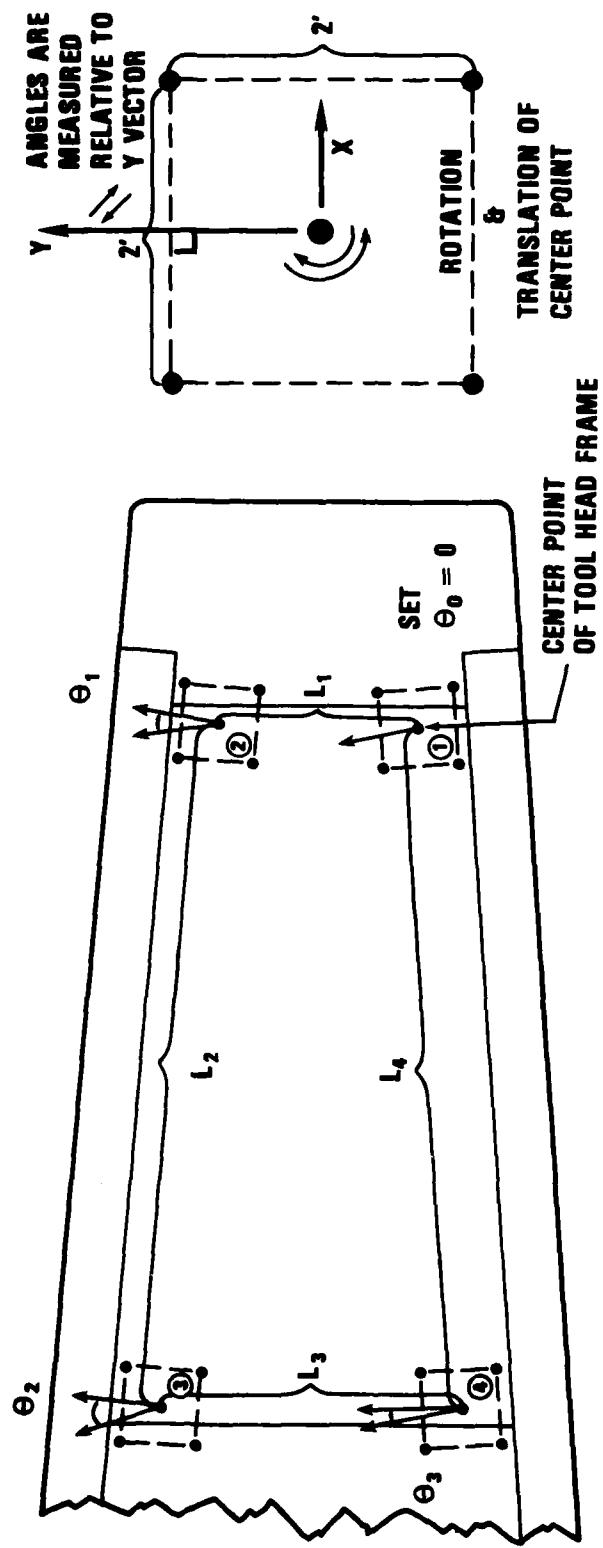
ROBOT ARM PROGRAMMING AND AUTOMATED TOOL HEAD FRAME POSITIONING
